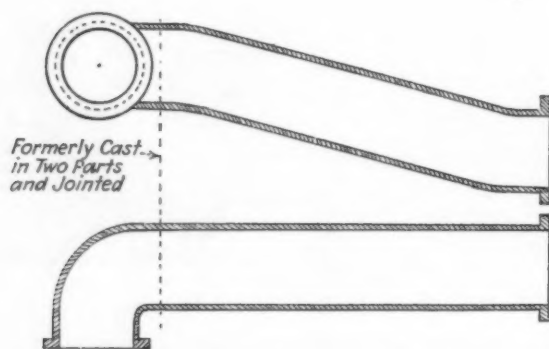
Marine engine discharge pipe, 16 in. inside diameter, 10 ft. long and weighing about 1500 lb. The upper view shows the position in which the pipe was molded.
